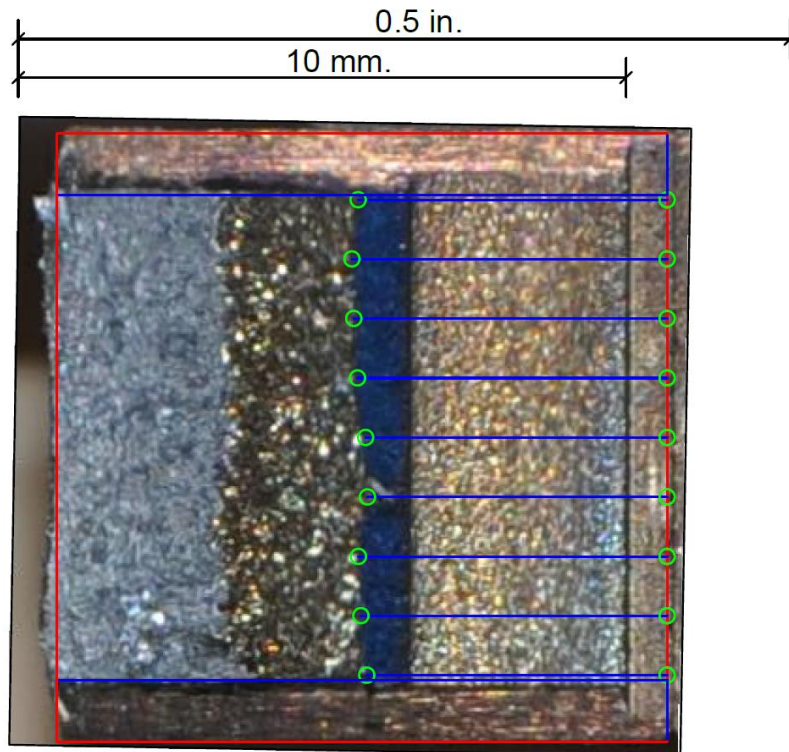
Specimen P7' Fracture Surface
